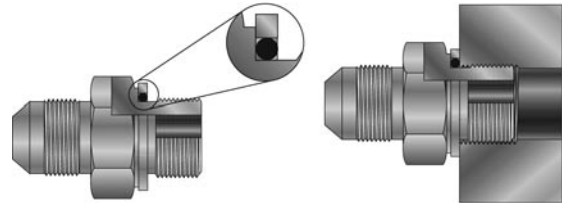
O-Ring with Retaining Ring, Types G & H
